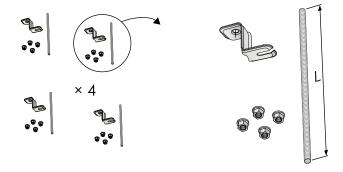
Assembly piece SYST MS M8-1, ceiling mount and threaded rod
